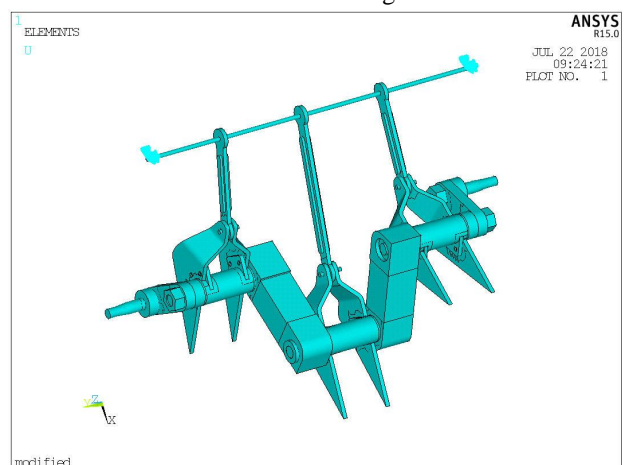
Boundary conditions on modified Voor cutting equipment assembly for modal analysis
